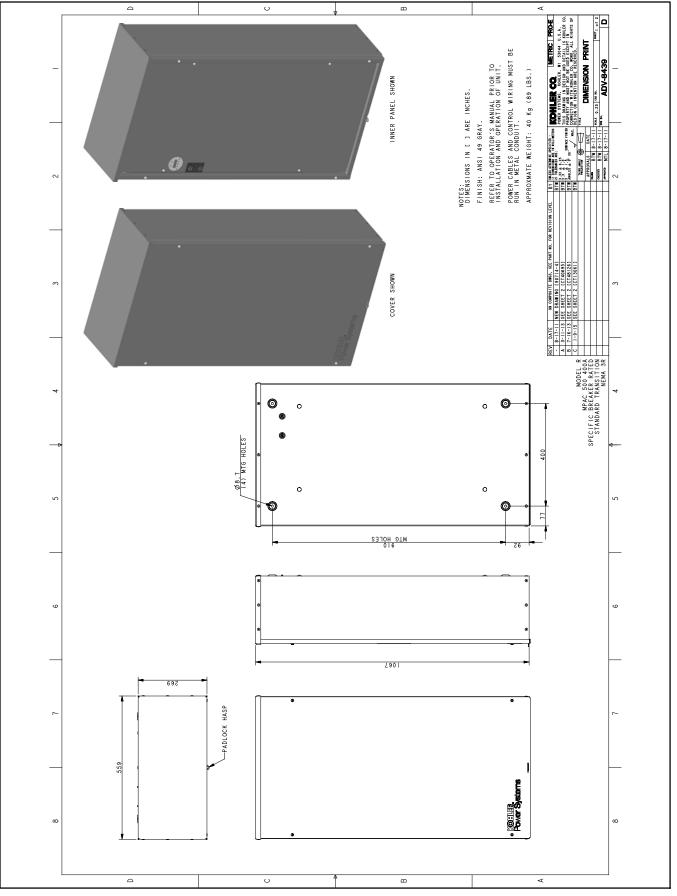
Dimension Drawing, 400 Amp NEMA Type 1 and 3R Enclosure, ADV-8439, Sheet 1 of 2
